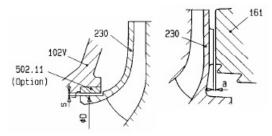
Suction side of impeller (shown on left), Back vanes of impeller (shown on right)
